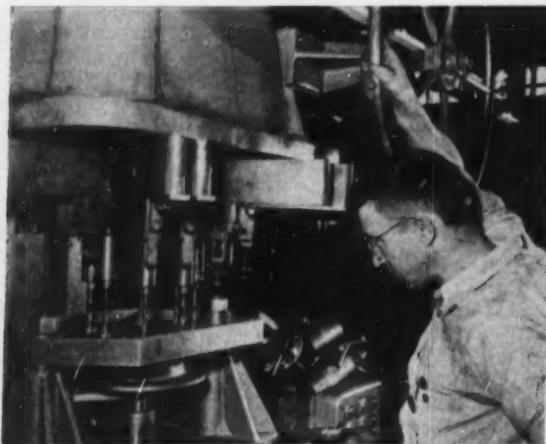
Here a worker is shown drilling eight holes simultaneously in a pump adapter. This multiple-spindle drill, however, is capable of drilling 16 holes at one time.
